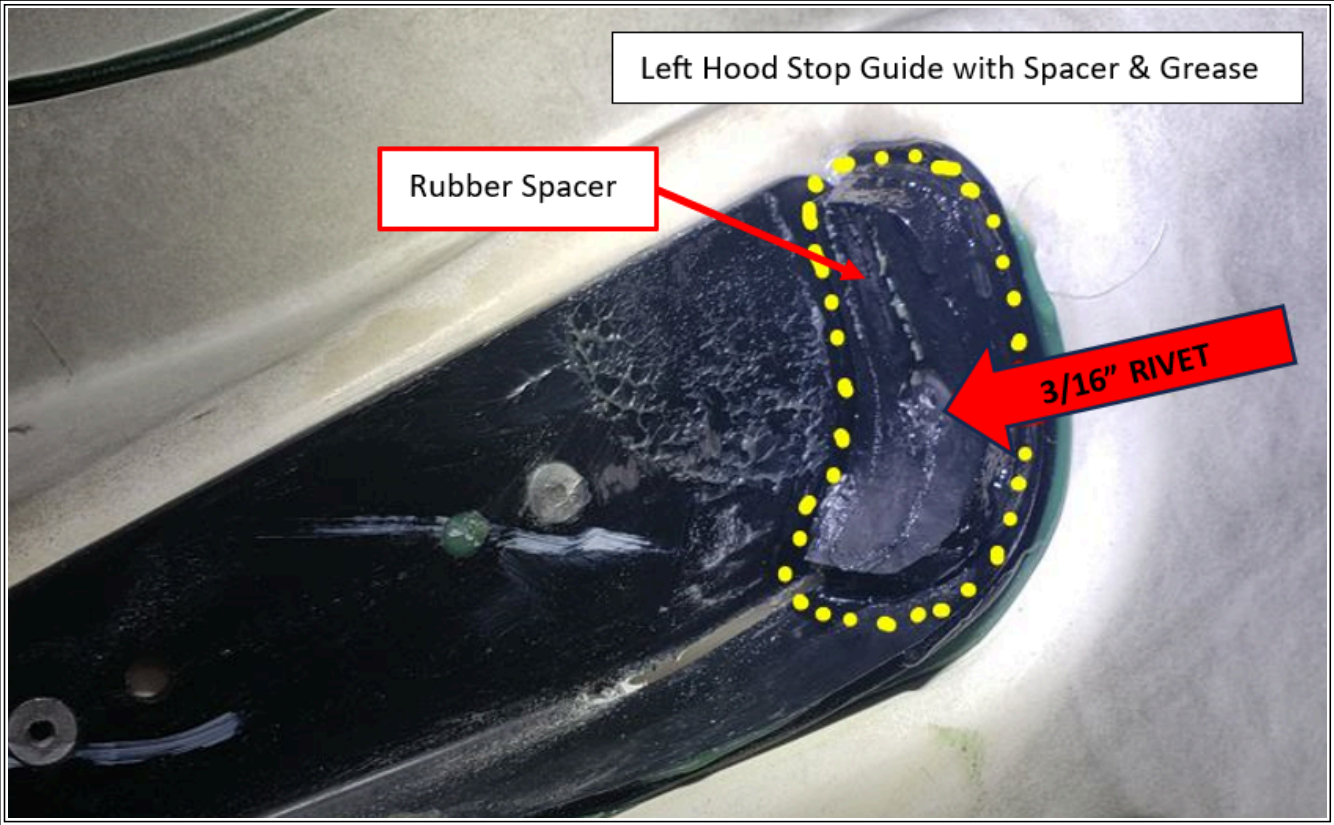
Rubber spacer riveted to hood stop guide with added grease
